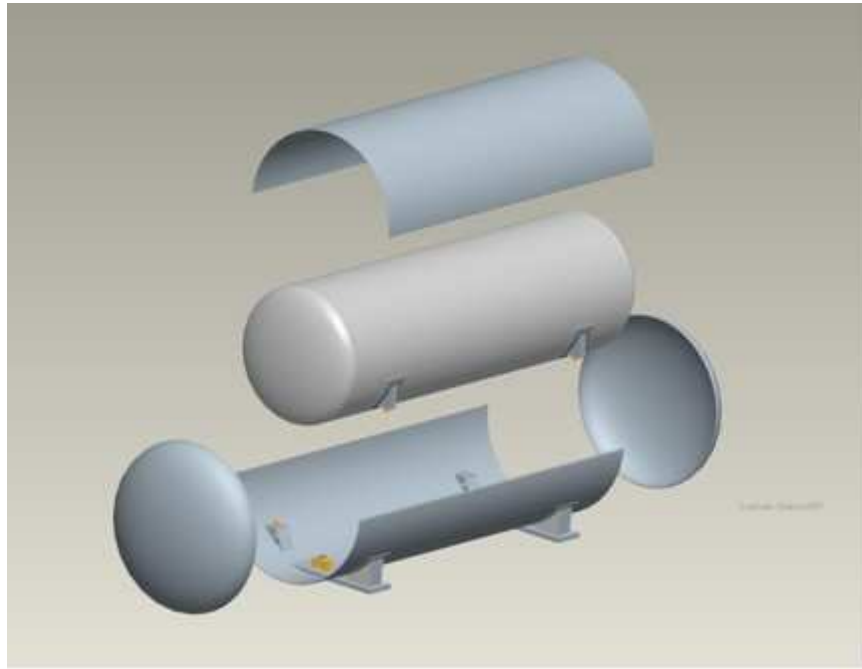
Exploded view of the warm, cold vessel and their support.
